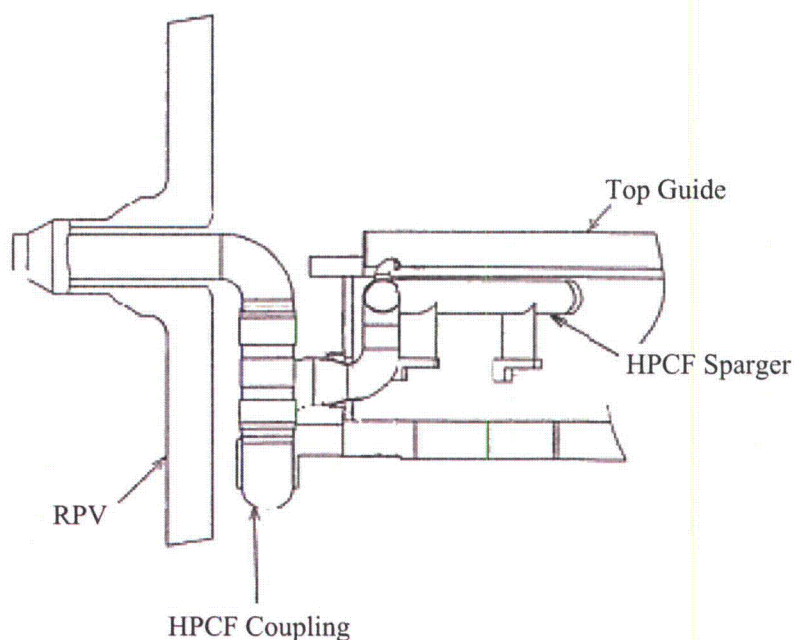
HPCF Sparger and Coupling Assembly
